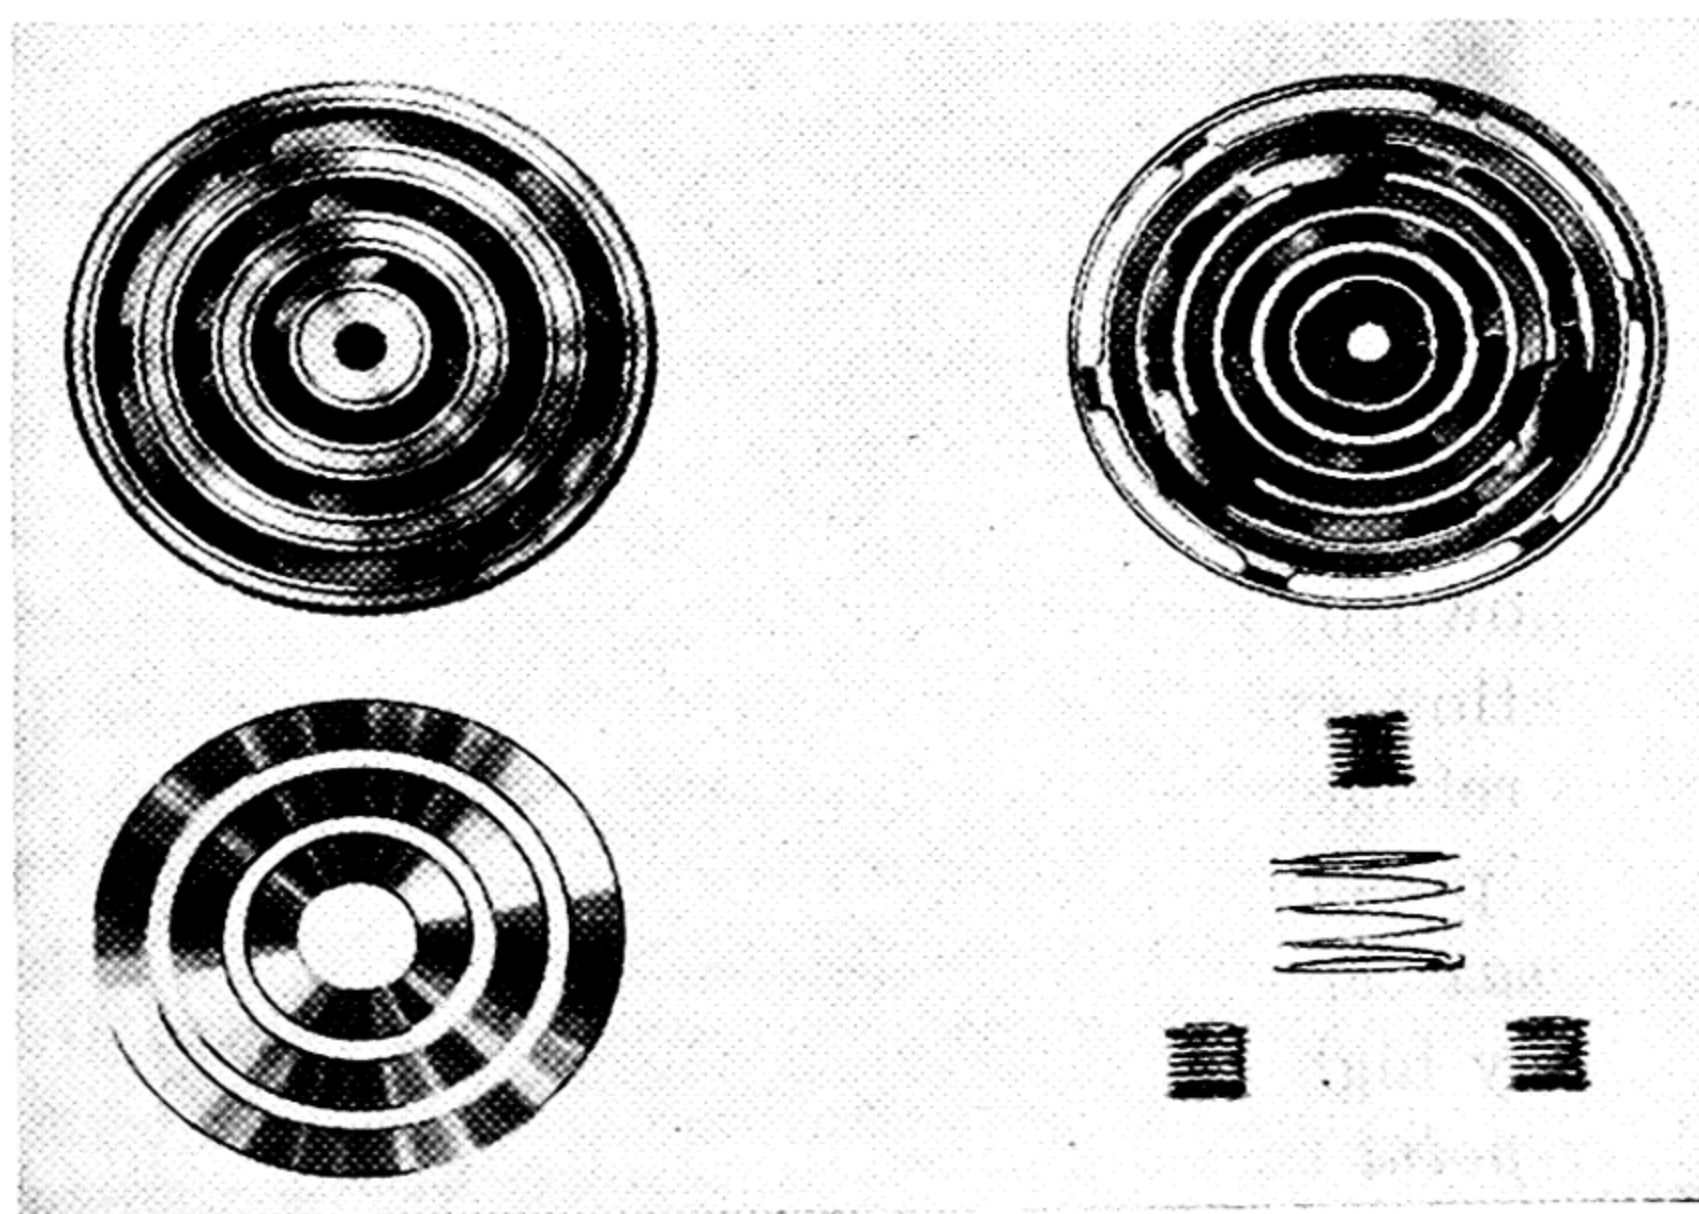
6-inch, 3-ring, ring-plate valve. Courtesy J. H. H. Voss Co.
